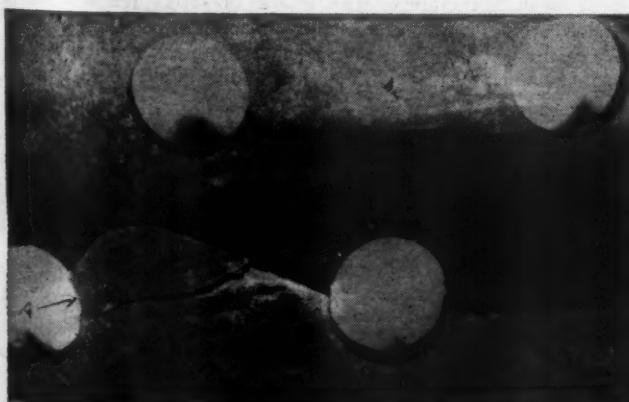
Close up of cracked area shown in Fig. 3—Cracked-out section at A was formed by shear stress in an aged steel
